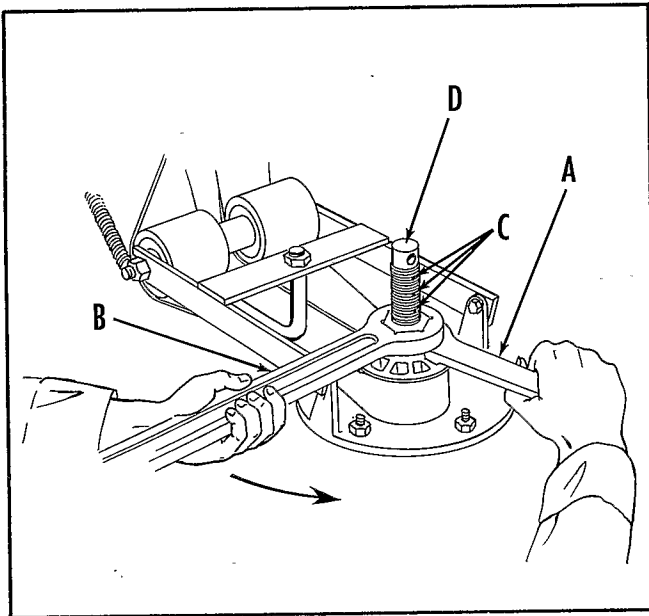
FIG. A. - HEIGHT OF CUT ADJUSTMENT
